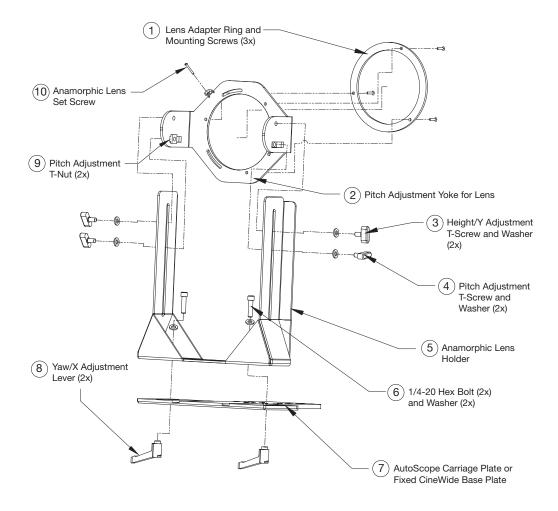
Cylindrical Anamorphic Lens Mounting Assembly - Exploded View
